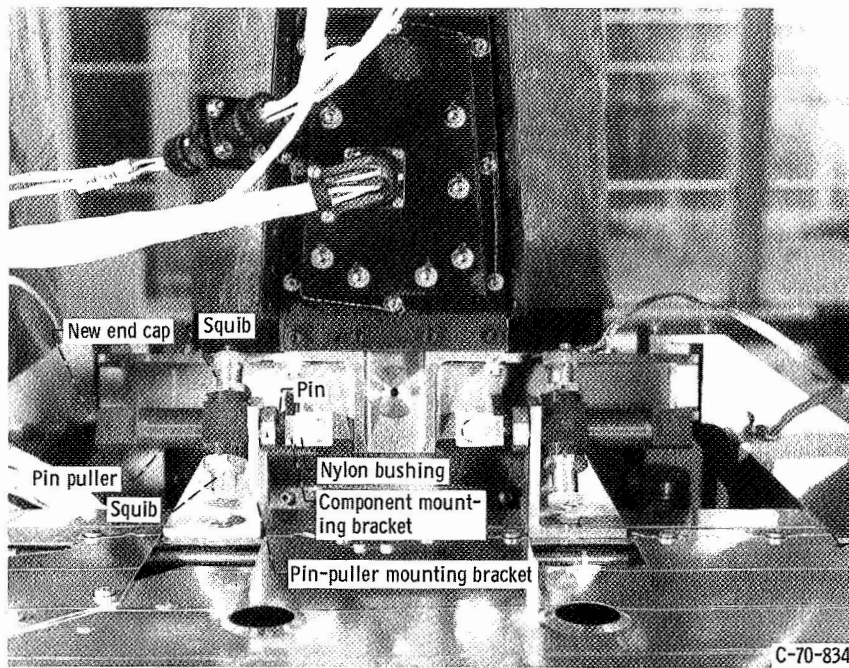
Final pin-puller configuration mounted on spacecraft.
